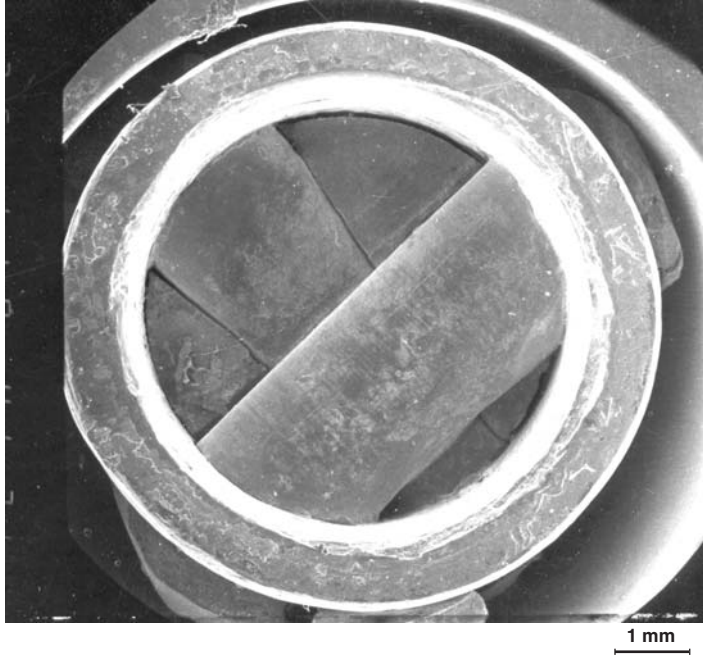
Fracture surface of the mating half of the stud, from inside the tube with rivets still in position
